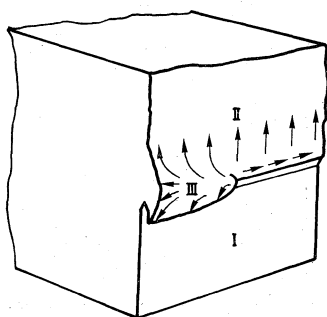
Hill-shaped fracture surface (I: notch surface, II: fracture surface parallel to I, III hill-shaped fracture surface. Arrows indicate the directions of crack extension, schematic).
